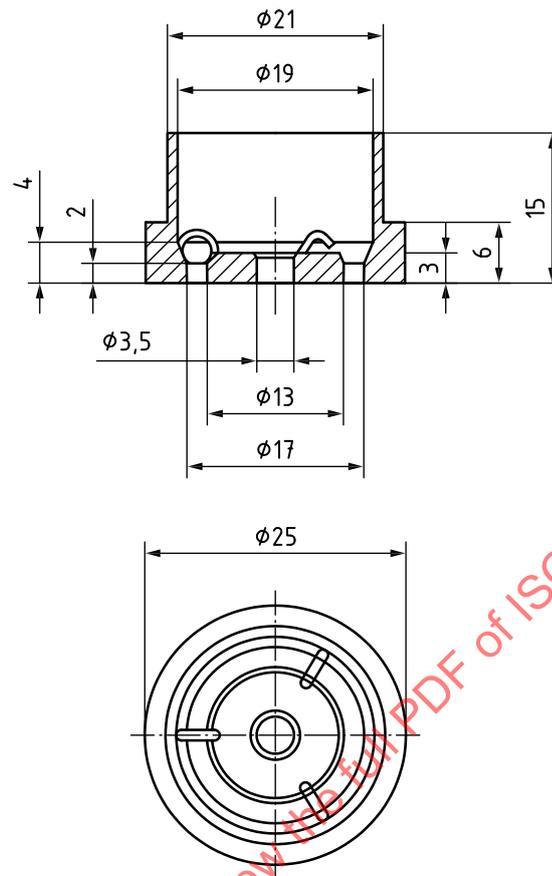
Outlet nozzle for falling sand apparatus (manufactured from brass with perforated plates held centrally by three connecting pieces)
